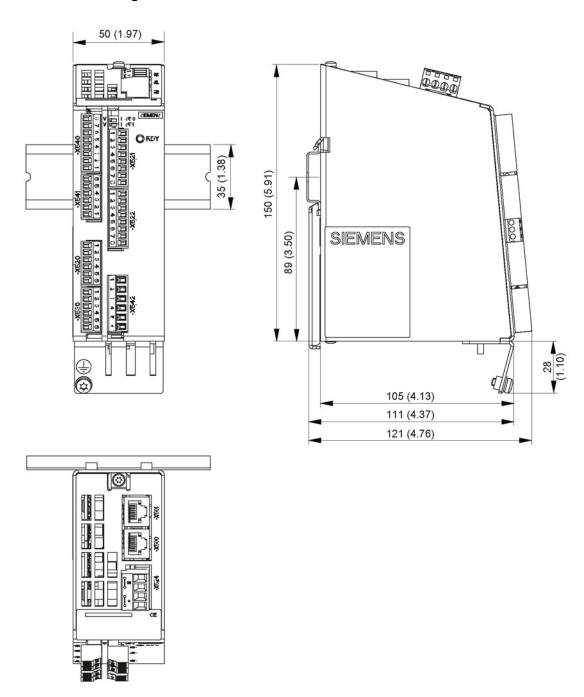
Dimension drawing of Terminal Module TM31, all data in mm and (inches)
